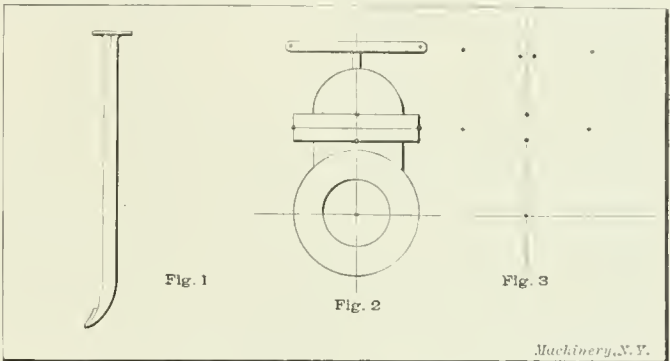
A Convenient Lifter for Small Tacks Fig. 2. Drawing to be reproduced Fig. 3. Method of Duplicating Drawing
